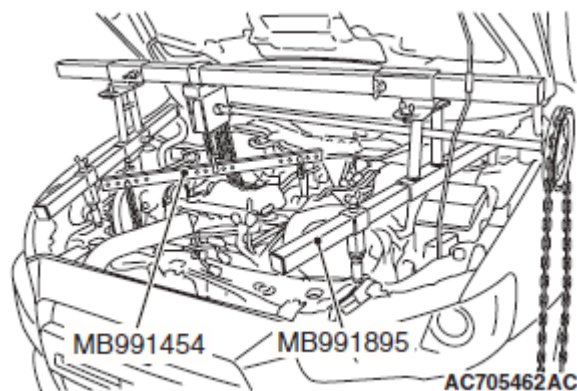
Supporting Engine And Transaxle Assembly Using Special Tool MB991454, MB991895
